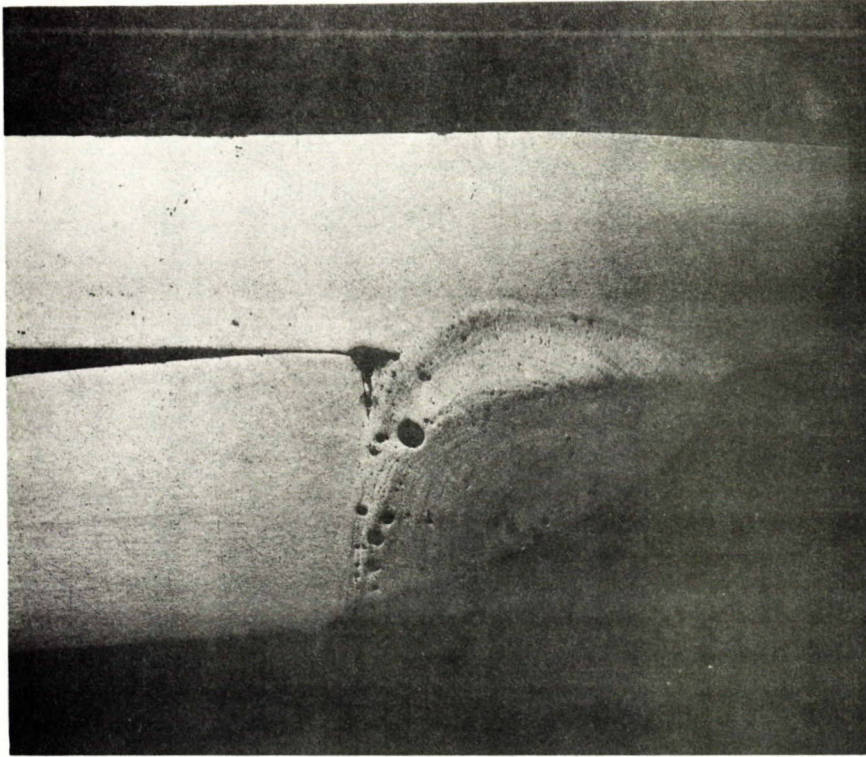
Multi-pass weld with incipient cracking in root defect. (Keller's etch; X6)
